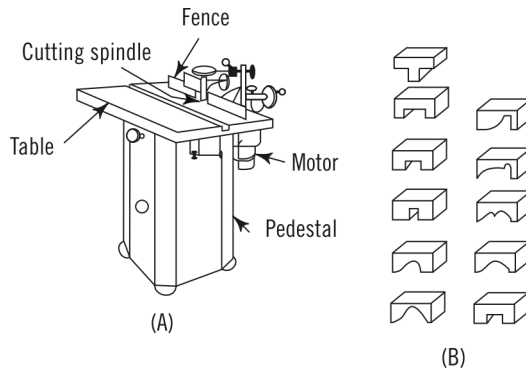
(A) Wood shaper; (B) Types of cut taken by a wood shaper
